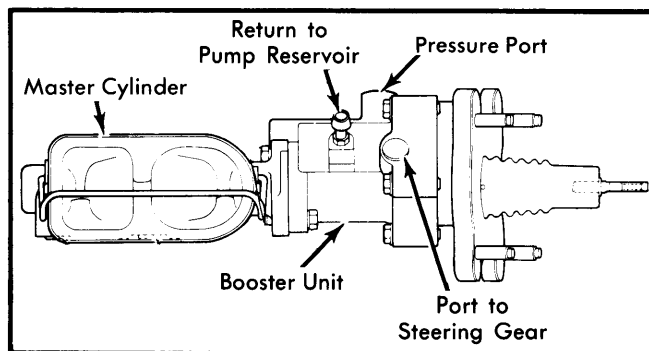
Ford Motor Co. Hydro-Boost Power Brake Unit (Versailles Shown)
